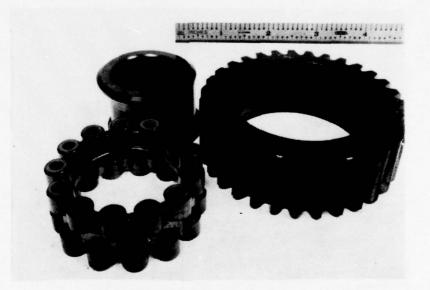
Upper planetary pinion, bearing inner race, rollers, roller guides, and retainer after 54-minute loss-of-lube test of optimized transmission configuration number 2.
